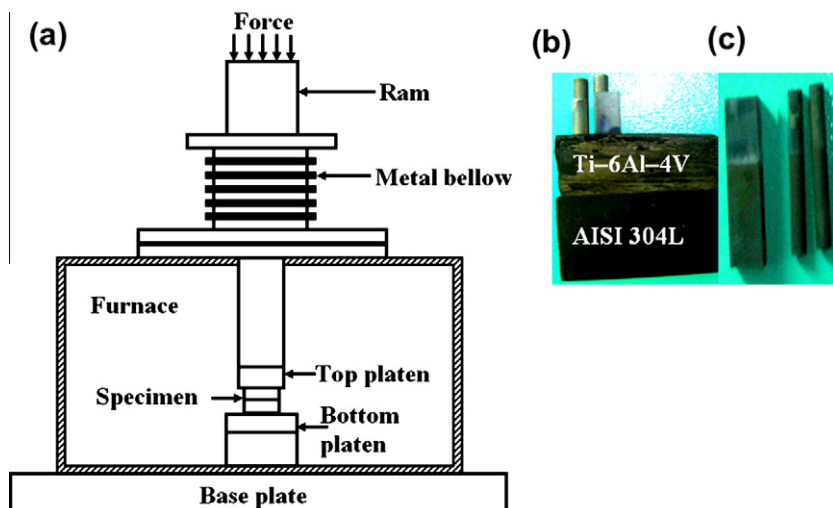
(a) The joint assembly, (b) diffusion-bonded sample with wire-cut specimens, (c) wire-cut metallographic and tensile test specimen.
